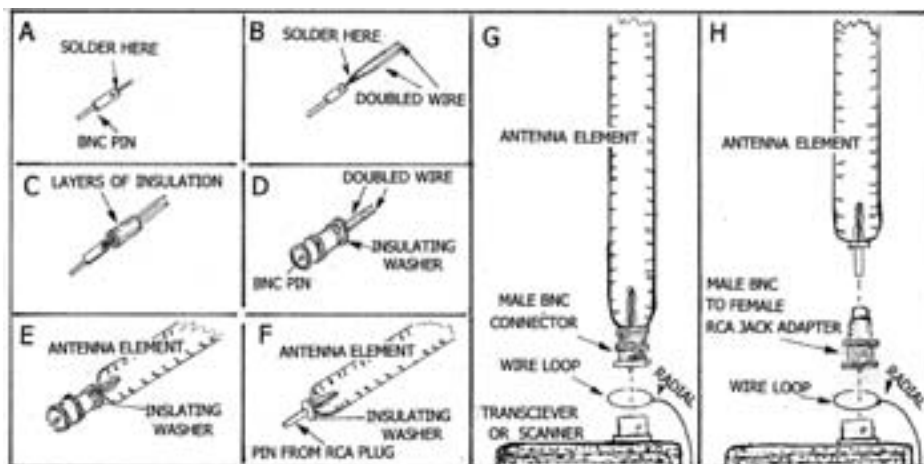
SOLDERING WIRE INTO BNC PIN (A), SOLDERING DOUBLED WIRE ONTO PIN WIRE (B), INSULATING WIRES (C), ASSEMBLED MALE BNC WITH INSULATING WASHER (D), ANTENNA ELEMENT ADDED TO BNC CONNECTOR (E), RCA PIN WITH INSULATING WASHER ADDED TO ANTENNA ELEMENT (F), CONNECTING ANTENNA AND RADIAL (G & H).
